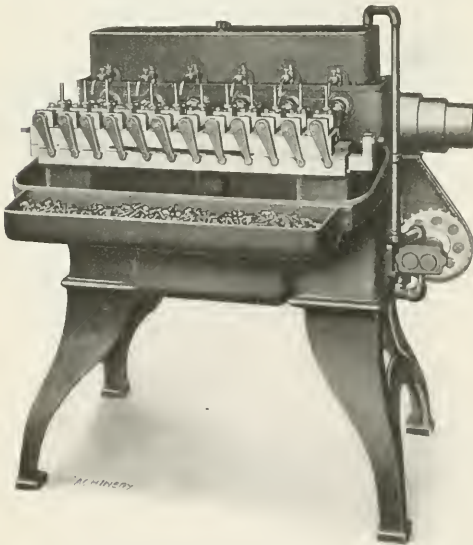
National-Acme Six-spindle Bolt Drilling Machine
